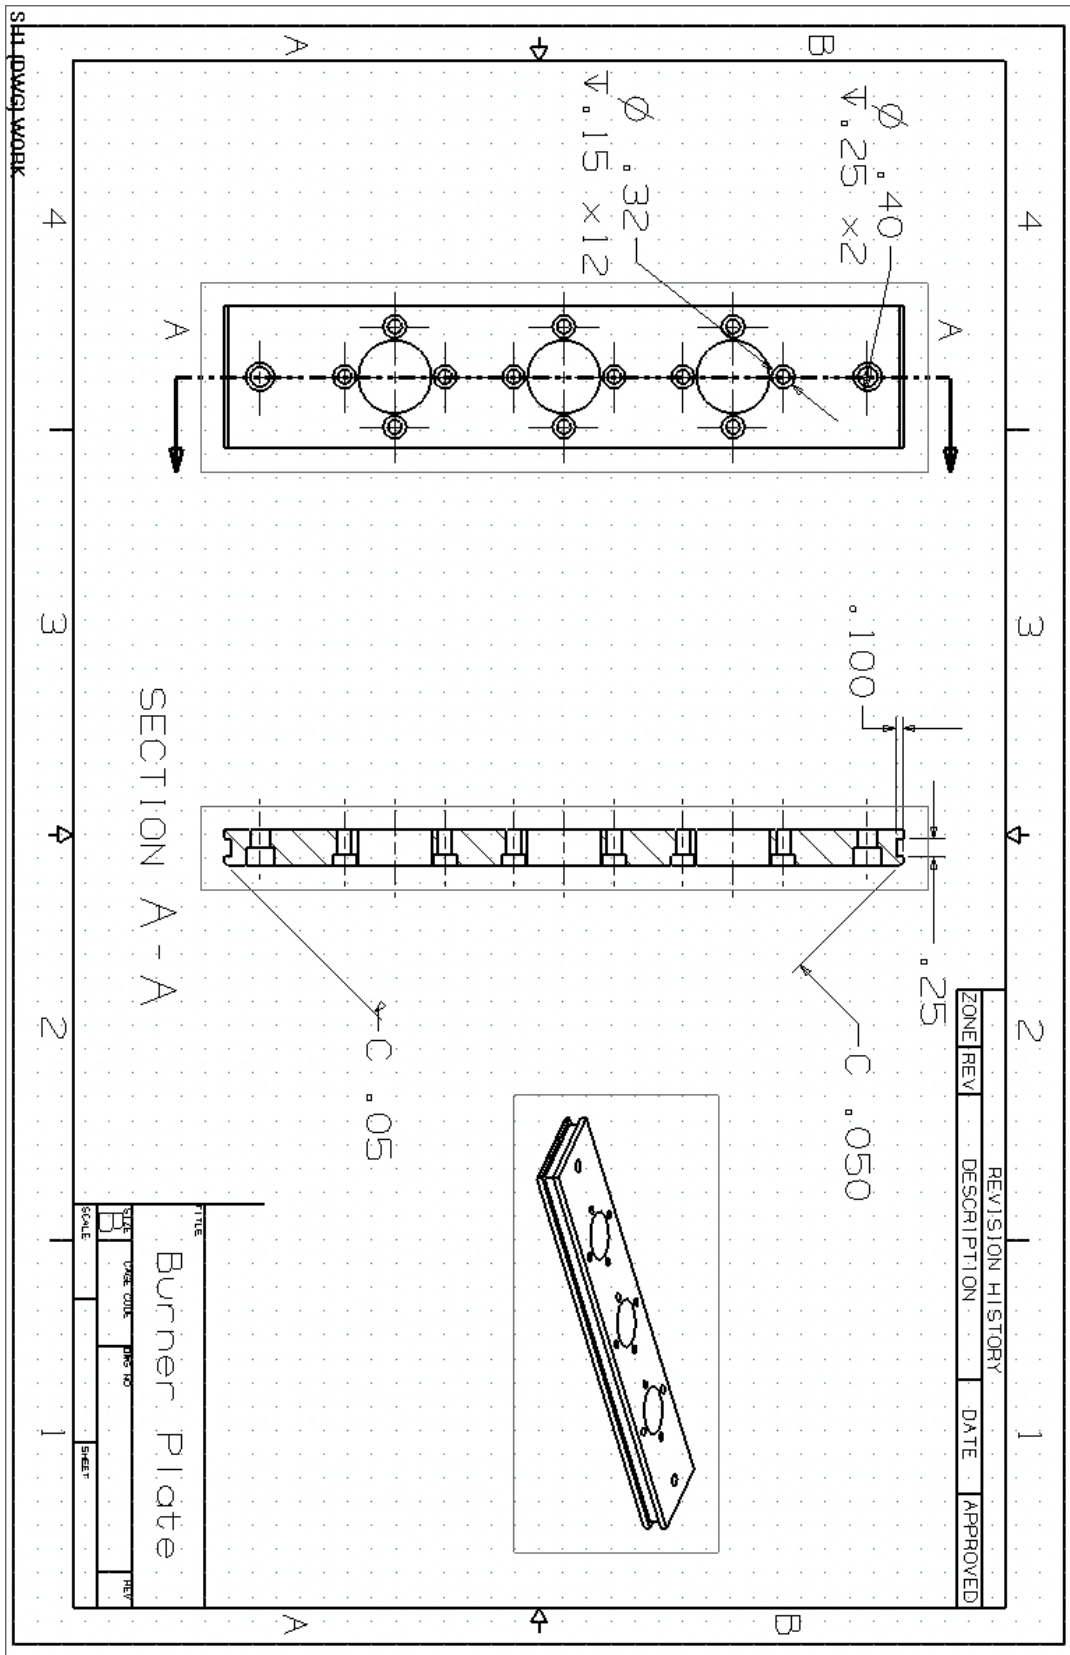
Engineering Drawing of the Burner Plate which holds the Injectors
